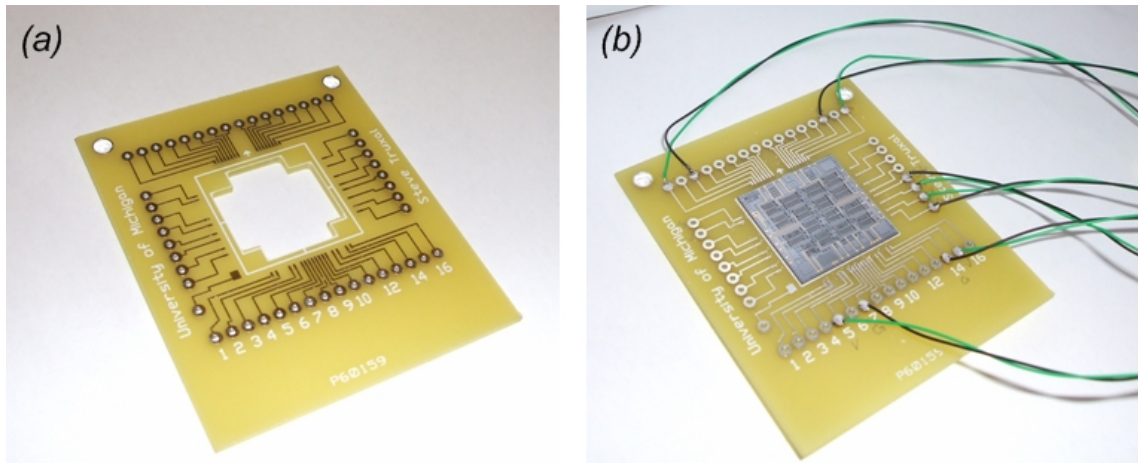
Images of the device mounted to a carrier wafer. (a) A printed circuit board with a center cut hole. (b) A die mounted and wire bonded to the carrier board.
